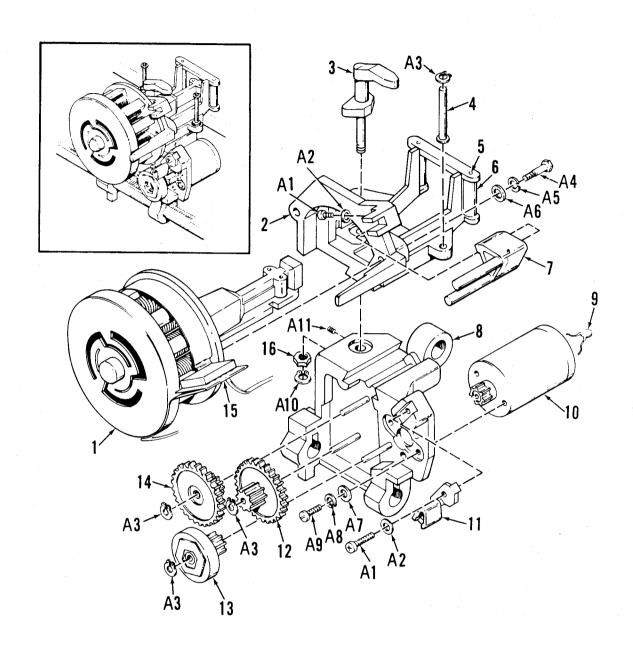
PRINT HEAD/CARRIAGE ASSEMBLY
